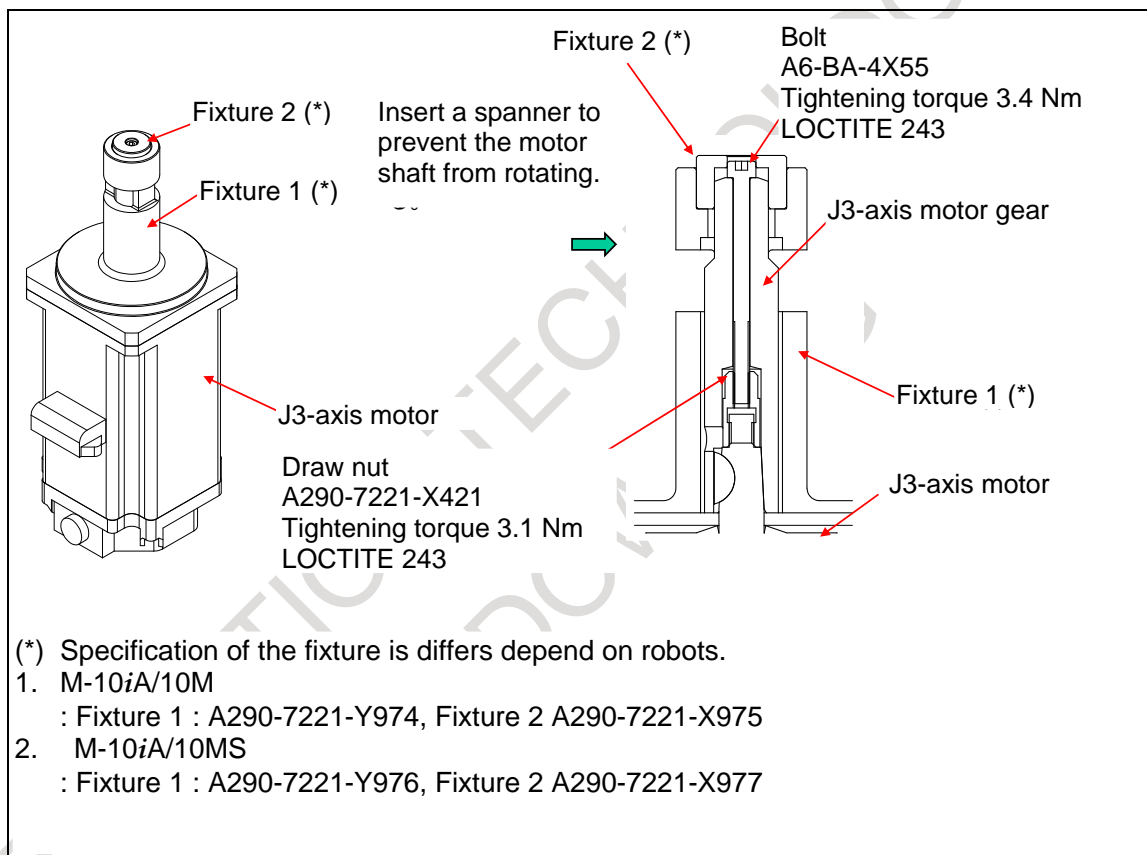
(a) Attaching the gear on the J3-axis motor
